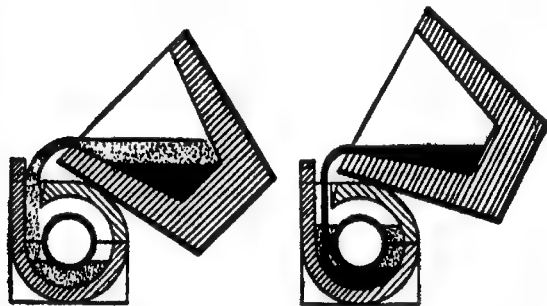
Showing the action of Thermit when poured into a pipe welding mould.
